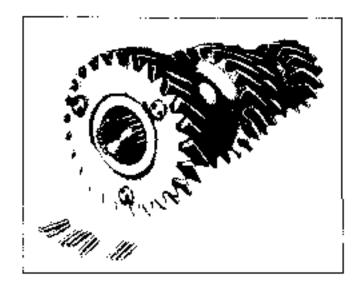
D×22 Loading Courtergear Bearing using J. 22279.
